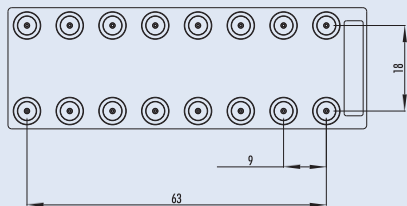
Microscopy slide Luer platform – version 16 fluidic interfaces
